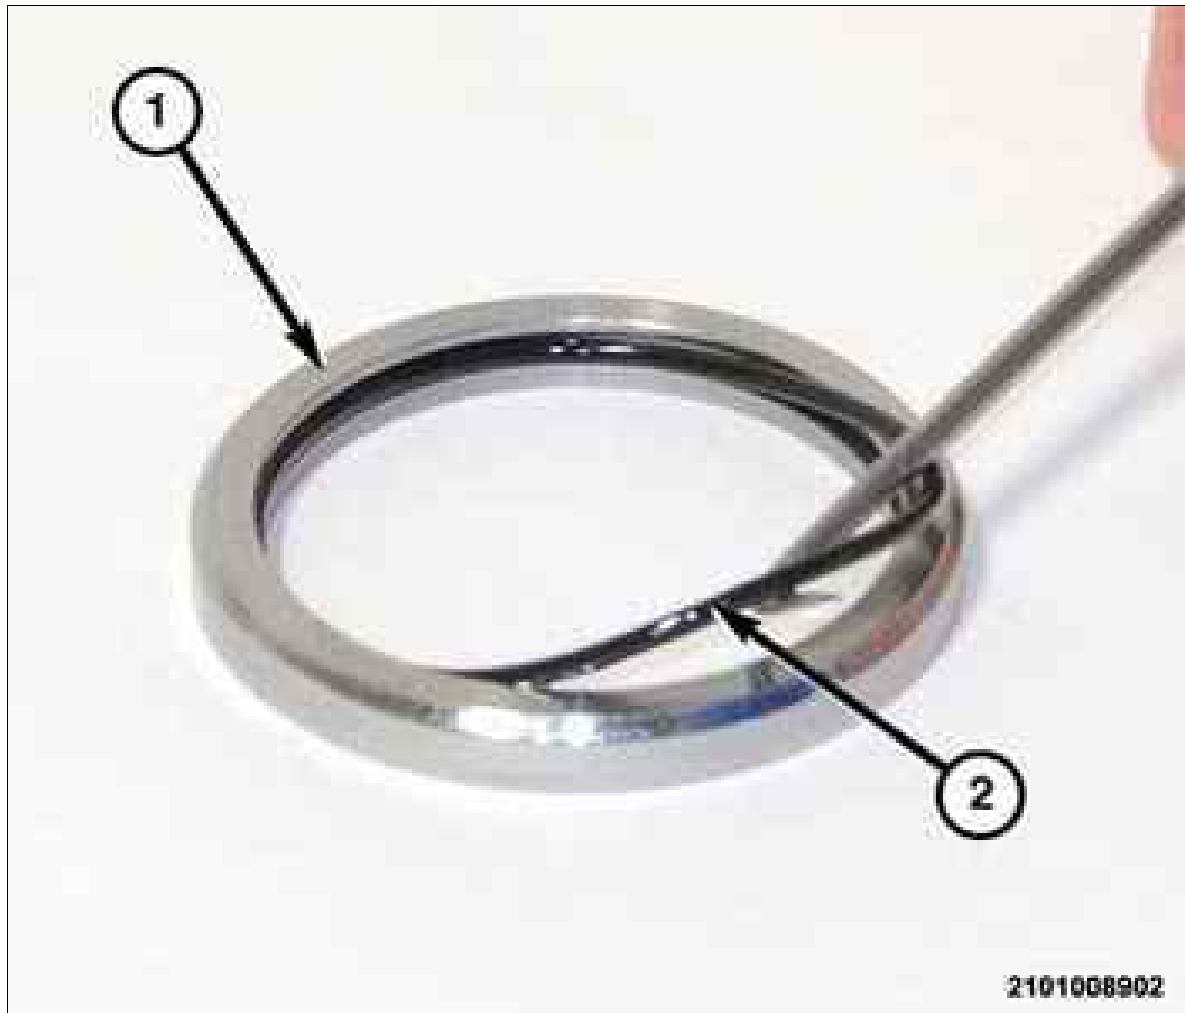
Removing Dog F-Clutch From Output Gear Support Hub
